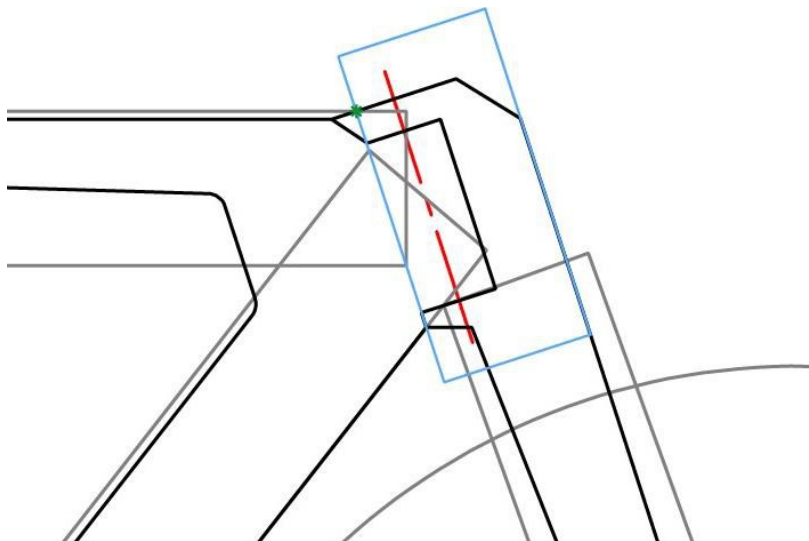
Illustration of the positioning of the axis of the head tube within the head tube box
